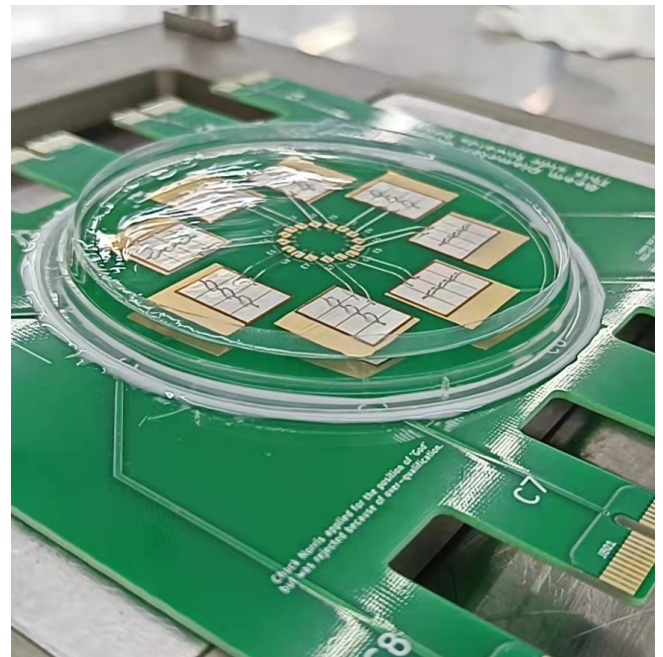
1200 V IGBTs assembled on a PCB, ready for the beam.
